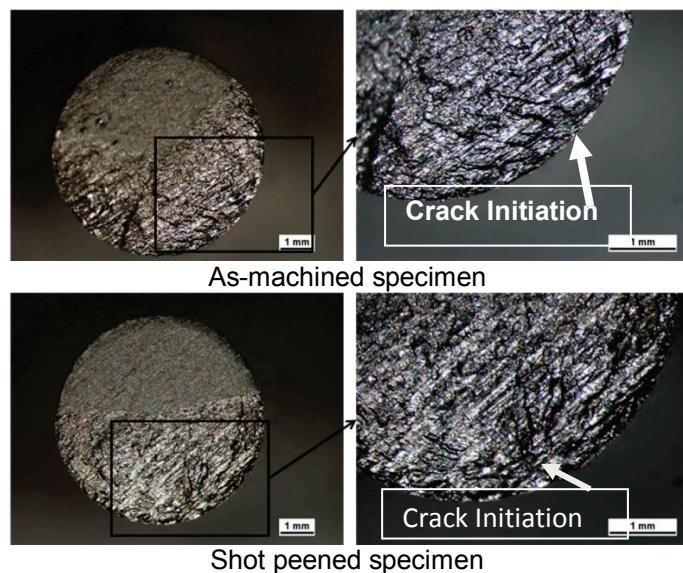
Typical fracture surfaces of as-machined and shot peened Al 7050 specimens.
